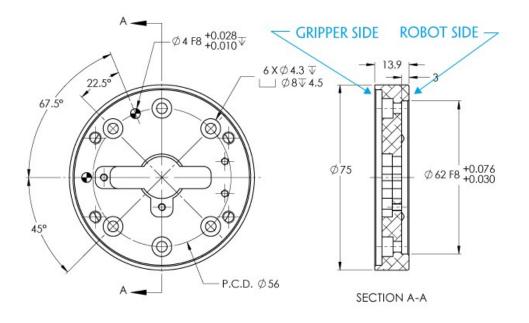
Coupling for PCD 56 mm with 8 x M4 clearance.
